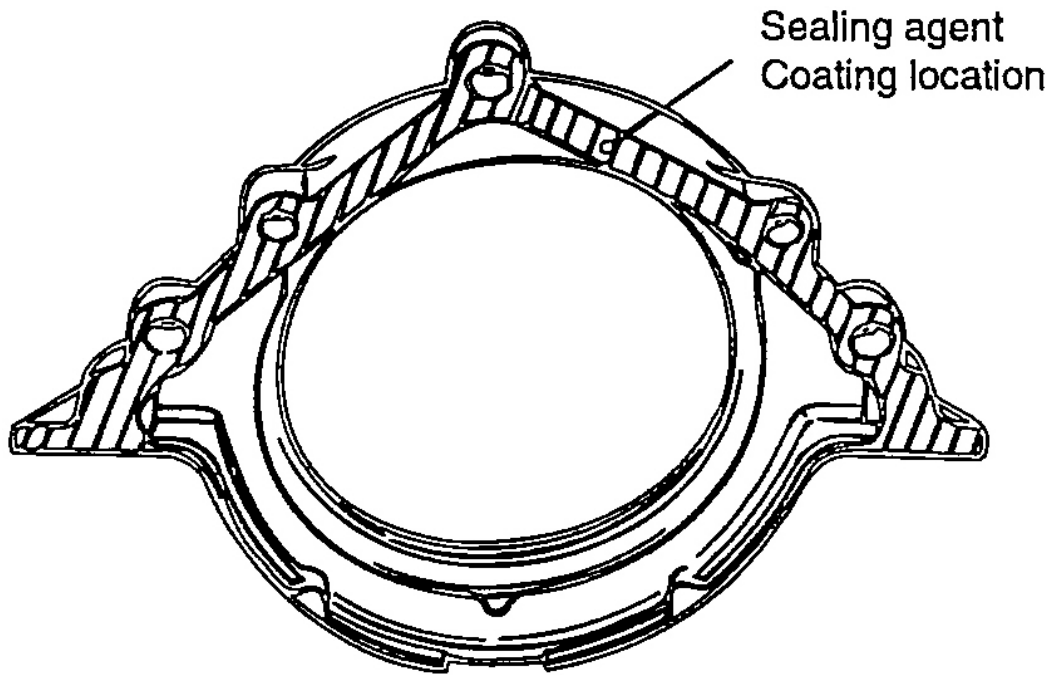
Installing Rear Oil Seal In Oil Seal Case
